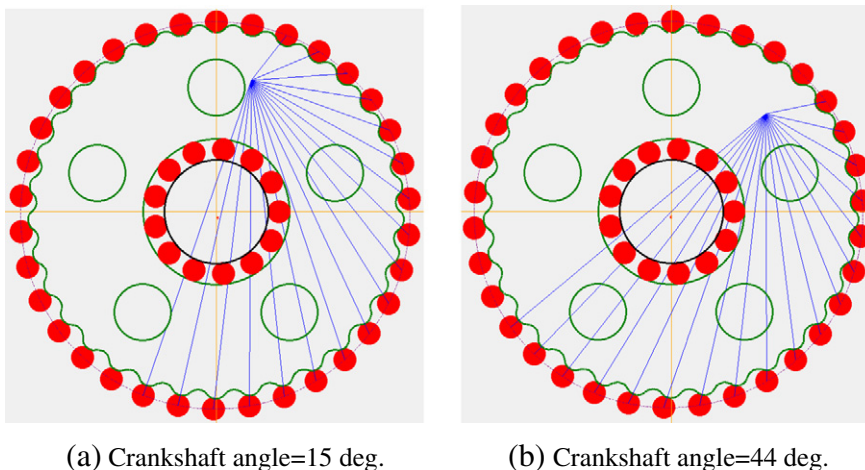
Tooth engagements at different angular positions of the crankshaft.
